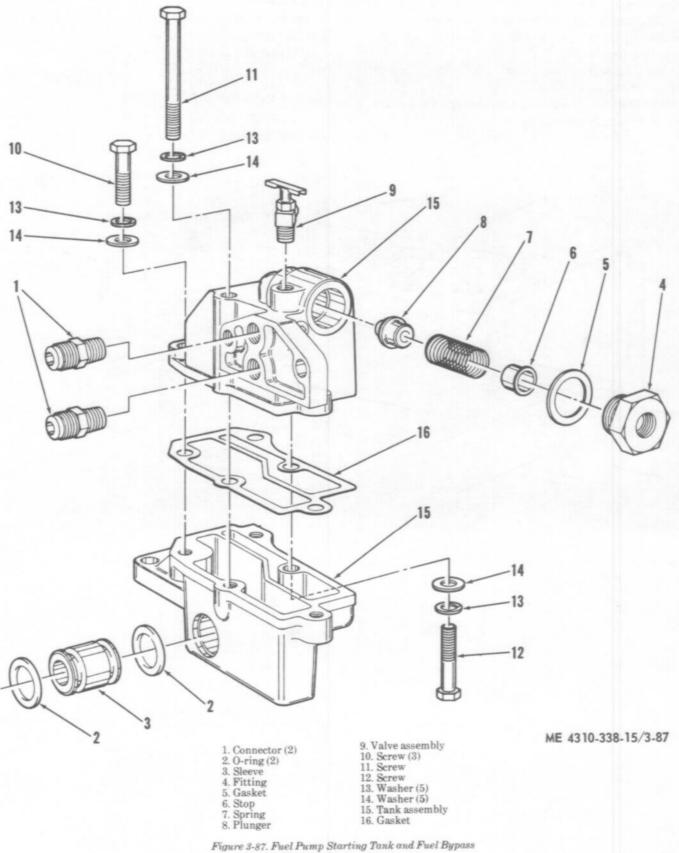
Fuel Pump Starting Tank and Fuel Bypass Valve; Disassembly and Reassembly.
